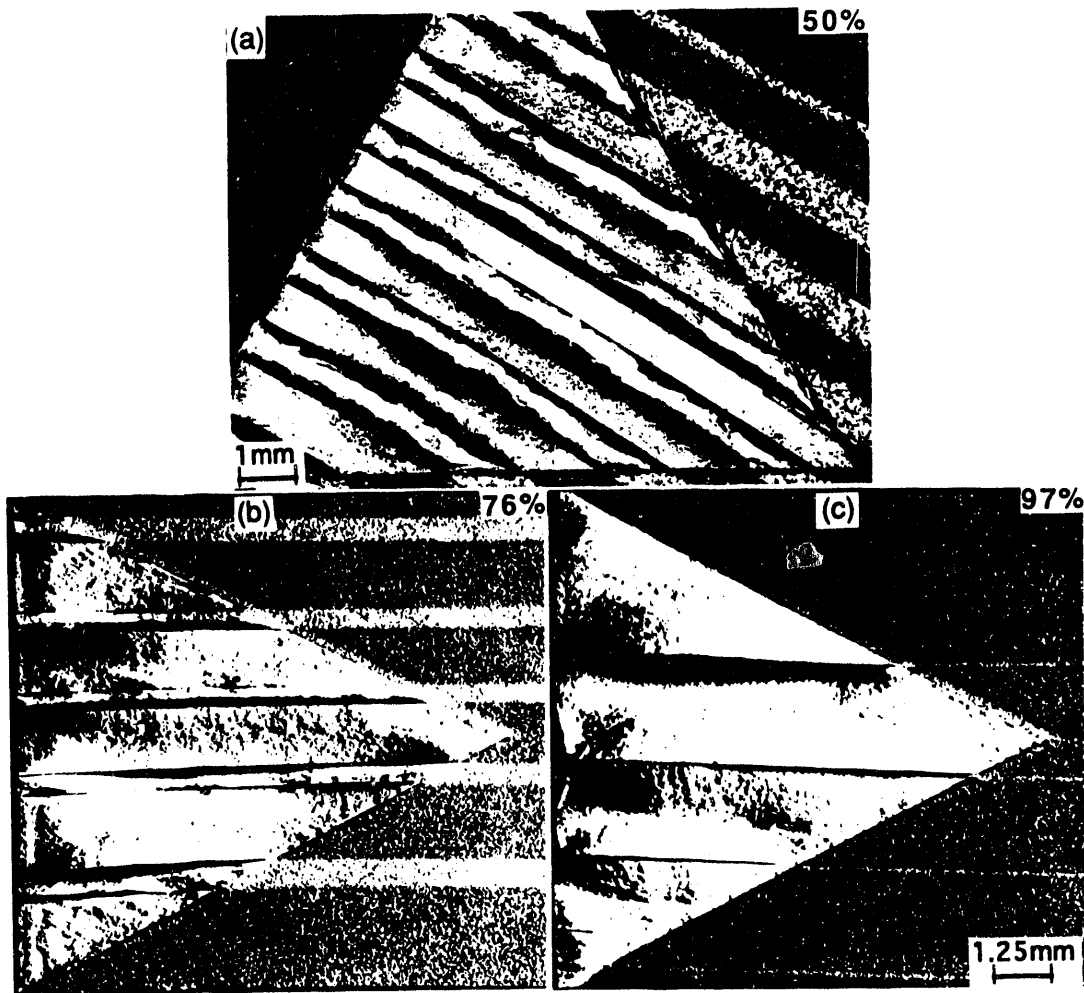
Fracture surface of the T6-treated laminates with (a) 50, (b) 75, and (c) 97 vol.% of the MMC component tested in the crack divider orientation.
